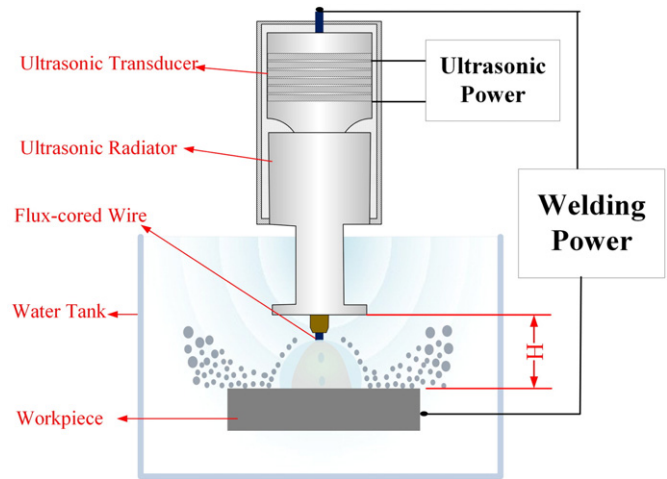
Schematic of ultrasonic assisted underwater wet welding (U-FCAW).
